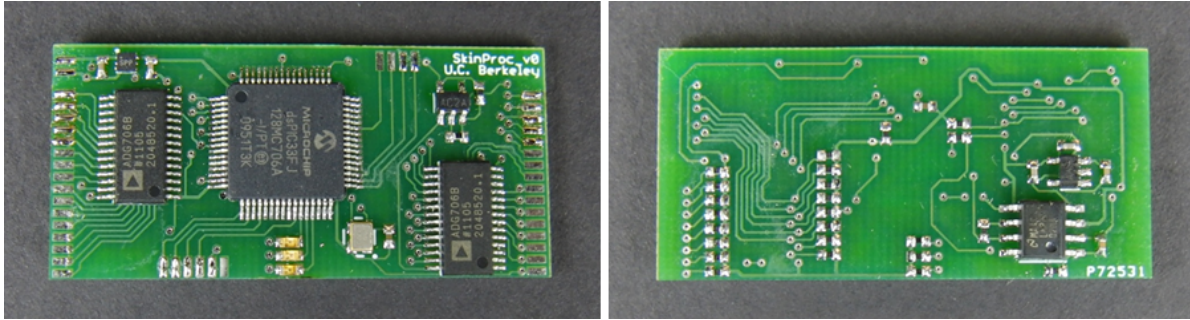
Images of front (left) and back (right) of SkinProc read-out electronics board. Board is 20 mm (W) by 43 mm (L).
